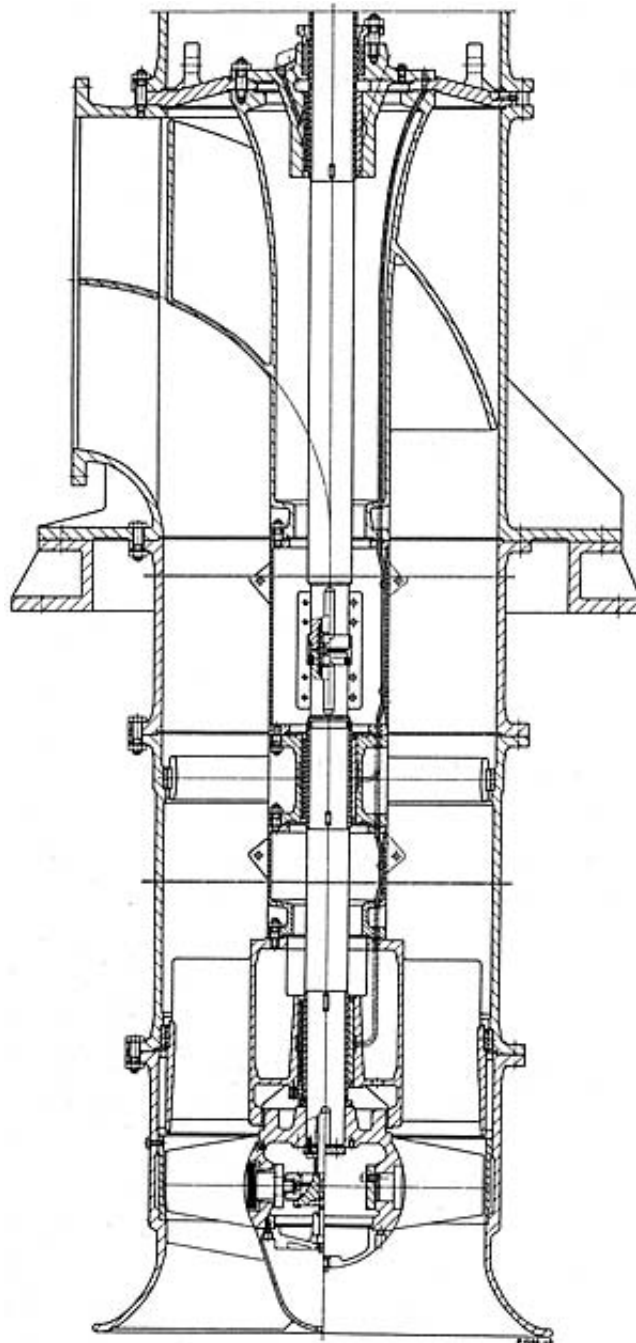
Propeller pump as tubular casing pump left-hand side: variable pitch blades, shaft guide bearings lubricated by product pumped; right-hand side: adjustable pitch blades, grease-lubricated shaft guide bearings
